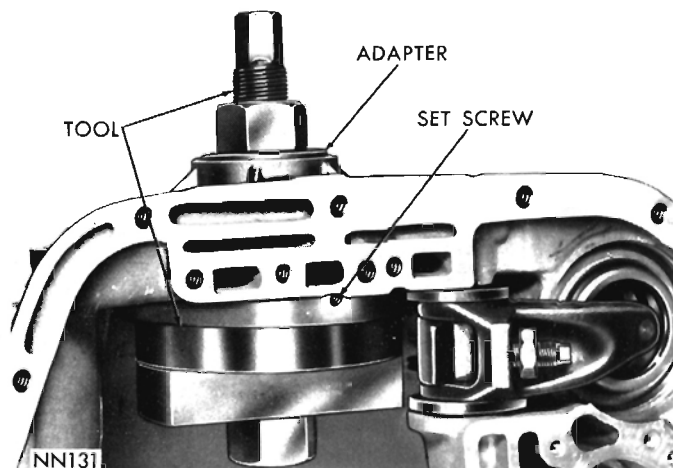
Installing Overrunning Clutch Cam (A-727)
